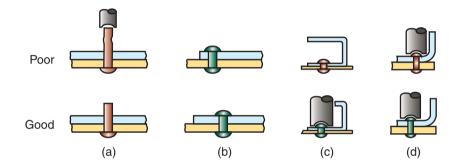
Design guidelines for riveting. (a) Exposed shank is too long; the result is buckling instead of upsetting. (b) Rivets should be placed sufficiently far from edges of the parts to avoid stress concentrations. (c) Joined sections should allow ample clearance for the riveting tools. (d) Section curvature should not interfere with the riveting process. *Source:* After J.G. Bralla.
